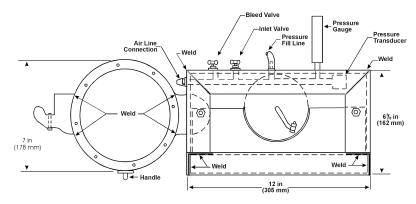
Evacuation Slide Material Test Apparatus – Side View
